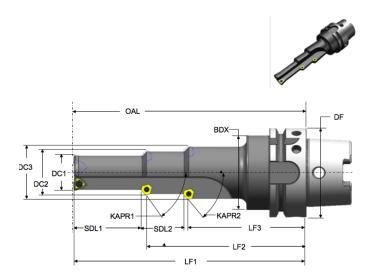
Cutting Tool Measurement Diagram 1 (Cutting Tool, Cutting Item, and Assembly Item – ISO 13399)
